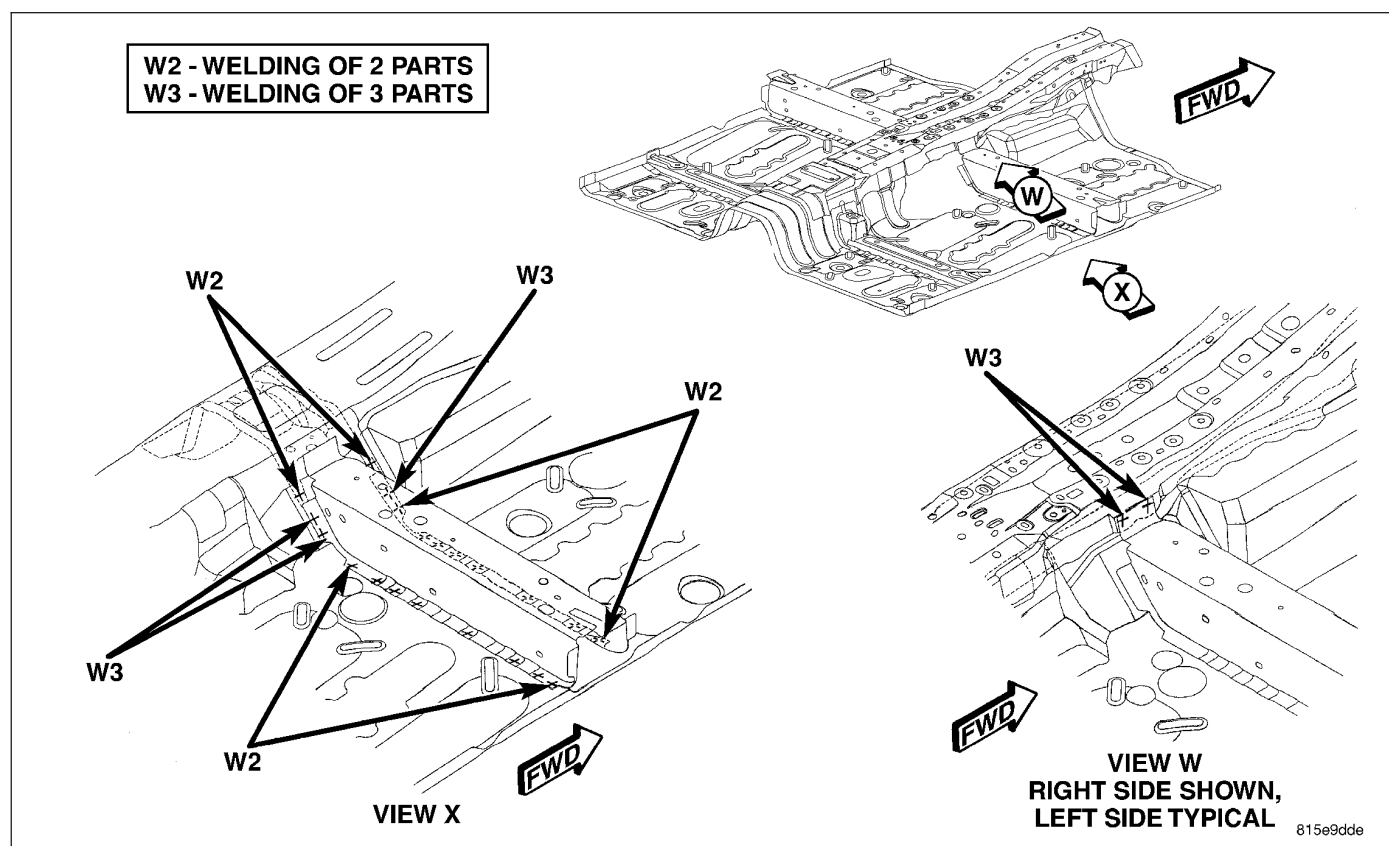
FRONT FLOOR ASSEMBLY (3 OF 4)
